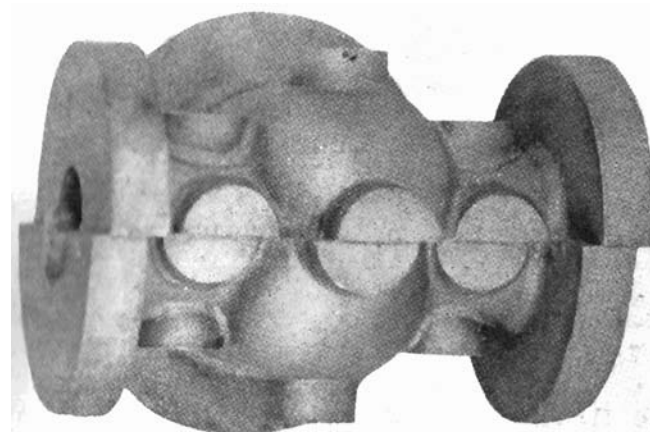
A crossjoint in a large grey-iron valve body casting produced by mismatch of the top and bottom parts of the mould.
